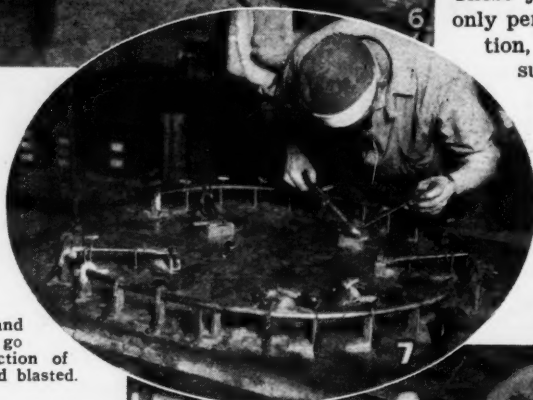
Building a frame for a stabilizer. This unit is also assembled and welded in a jig.
